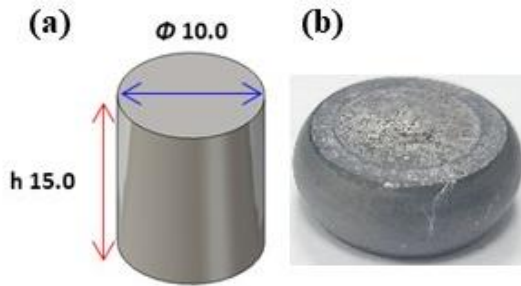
(a) Specimen geometries in the compression tests; (b) Specimen shape after the tests
